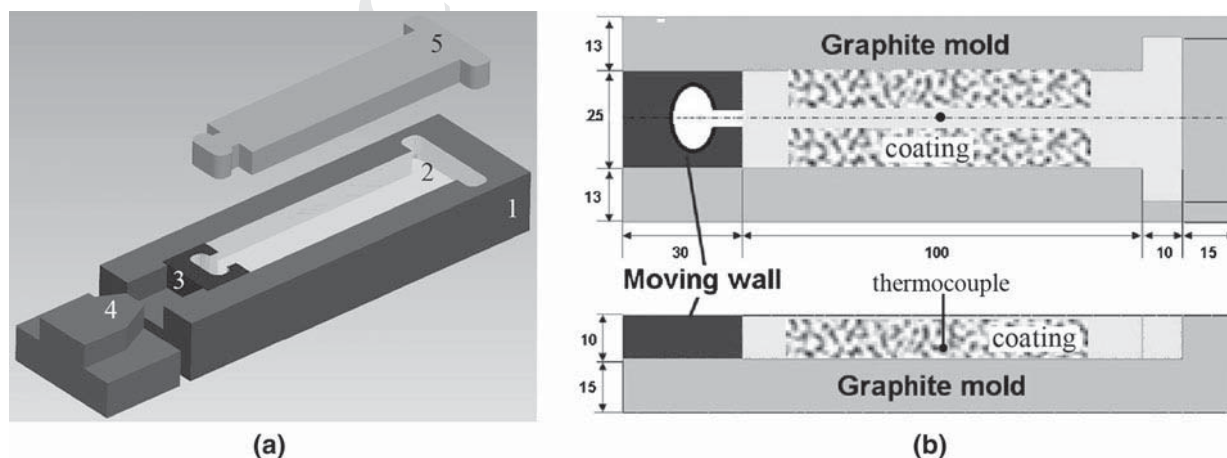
Experimental setup (a): mold (1), cavity (2), moving block (3), displacement sensor (4), and casting/sample (5), and drawing of the mold and coating scheme (b) where dimensions are in mm.
